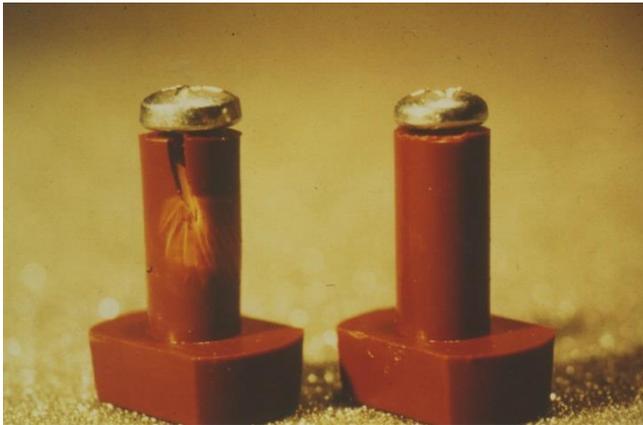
Material ABS, to the left sheet metal screw 60° threaded flank angle, to the right screw optimized for plastic application 30° threaded flank angle (CONTI Fasteners AG).
